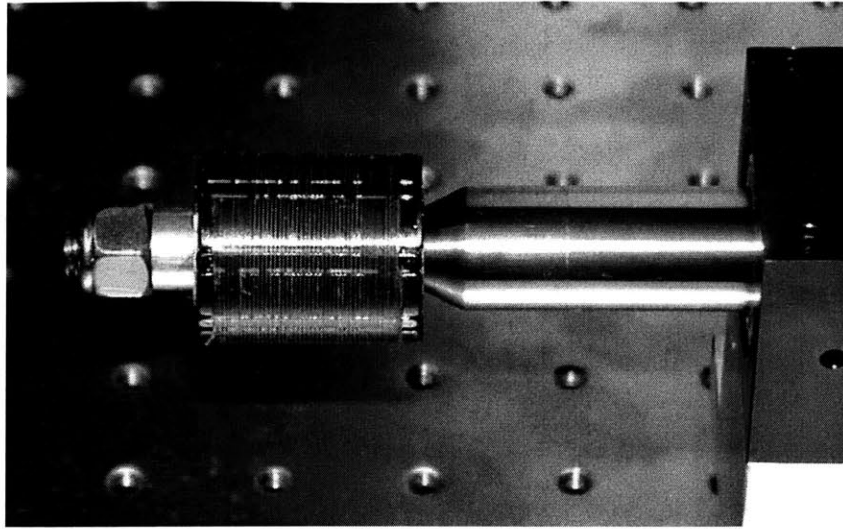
Aerotech rotary motor permanent magnet rotor mounted on shaft.
